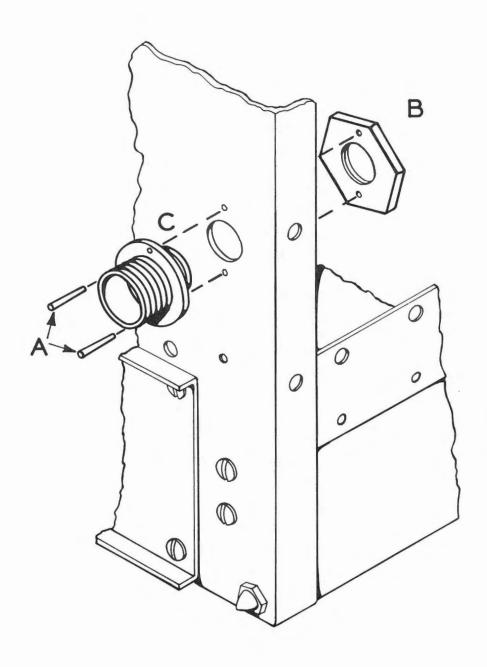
Removal of Drive Shaft Bushing Receiver ARA or AN/ARC-5 Receiver
